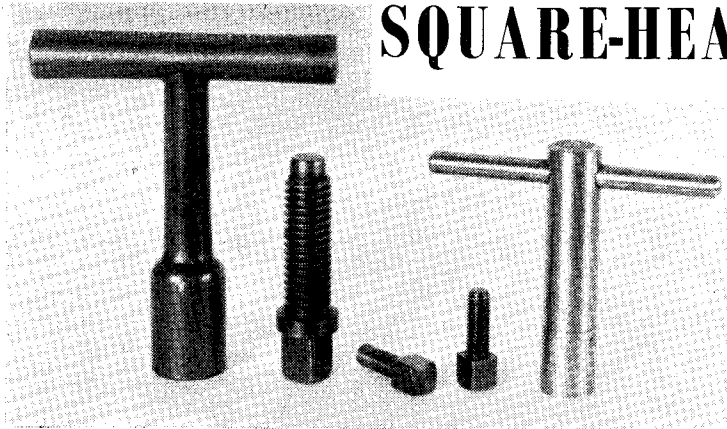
Left—a square-headed cap-screw and key ; Right—plain square-headed screws and jet key
